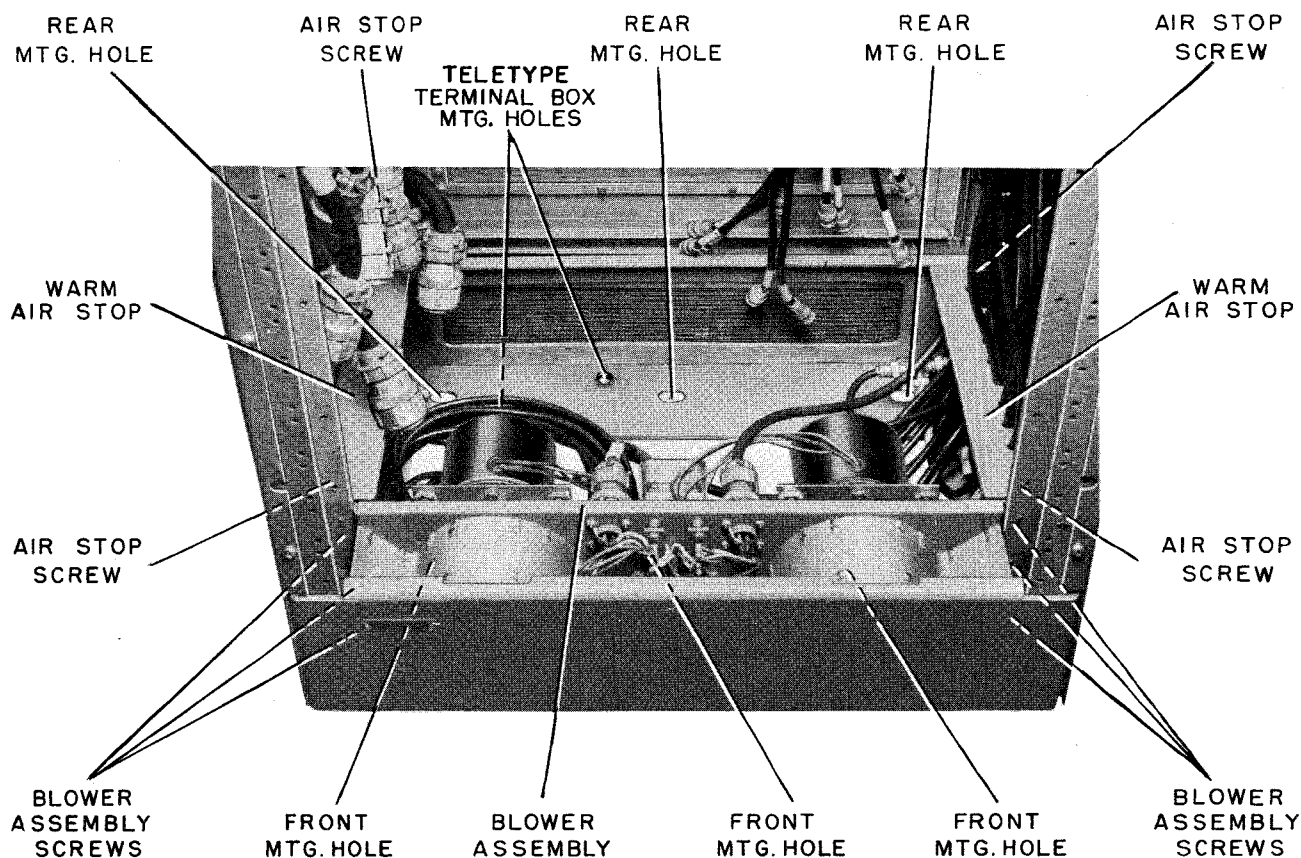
Mounting Details, Bottom of Cabinet CY-860/FRR-24
